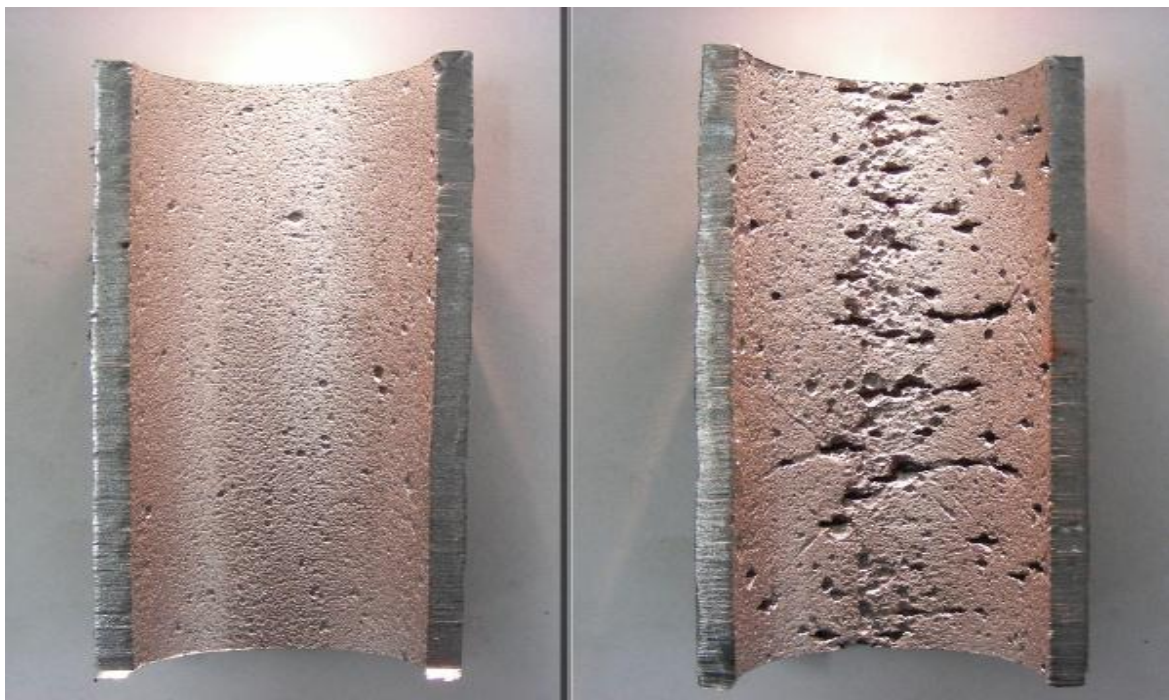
Pitting corrosion in boiler tube B [32]
